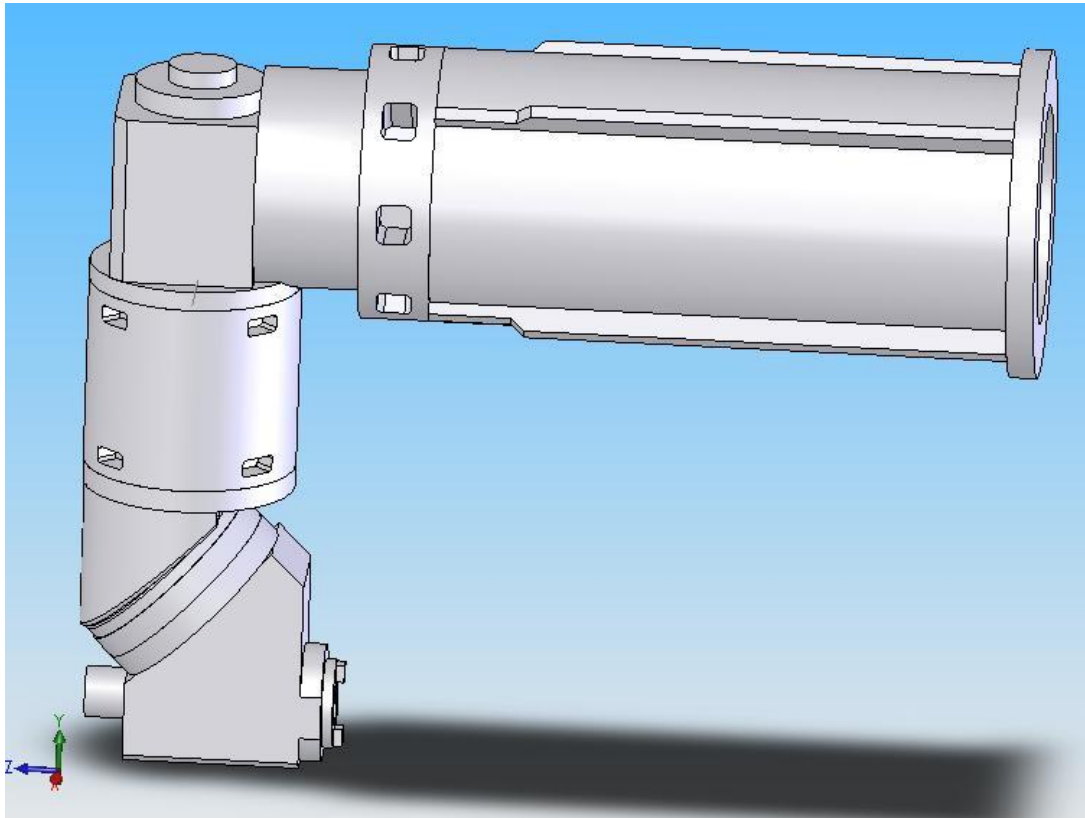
The attachment set of the machine able for the internal machining inside the customer part
